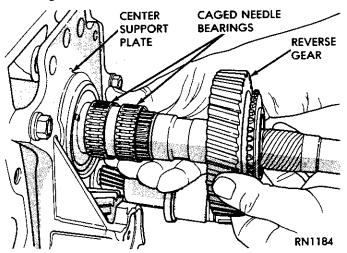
Removing/Installing Reverse Gear GEAR SET DISASSEMBLY
